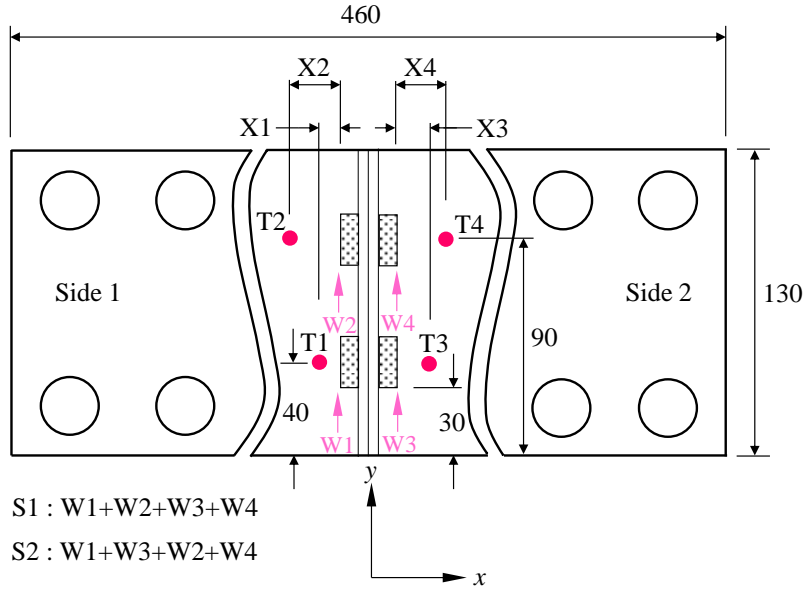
The location of the thermocouples attached to the top side of the intermittently fillet welded specimens in Publication III. The welding direction was in +y direction, and all the dimensions are in mm. T1–T4 are thermocouples on the top side. X1–X4 are the distances of the thermocouples from the weld toe, which were measured post welding. S1 and S2 show the order of the welding passes.
